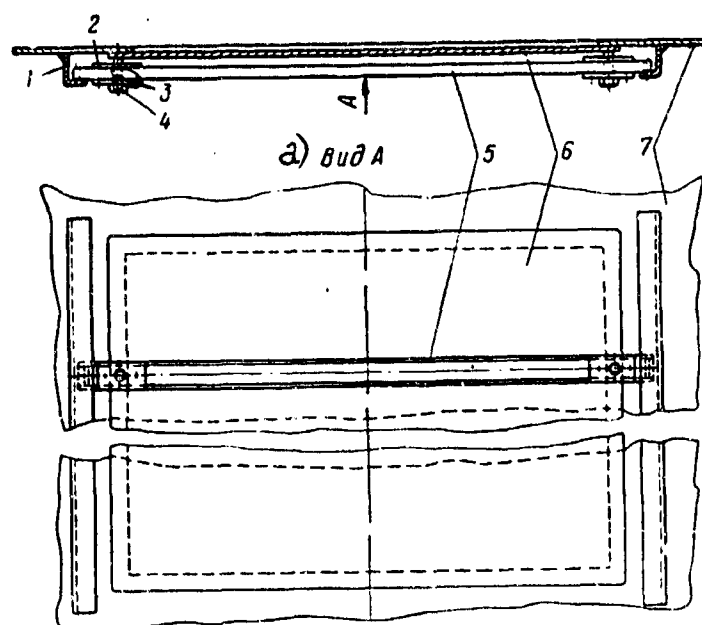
Clamping Unit for Large Patches or Cover Sheets: 1- guide corner brackets; 2- slides; 3- strips (linings); 4- clamping bolts; 5- mobile strip; 6- cover sheet; and 7- planking.
